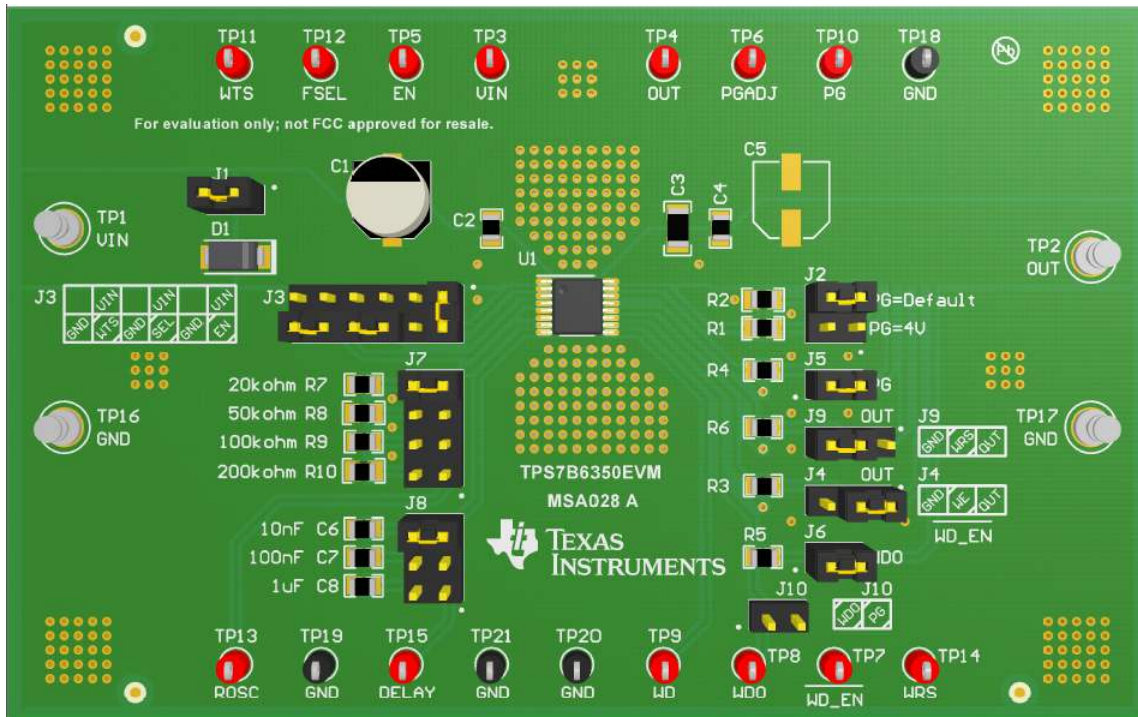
TPS7B6350EVM Component Placement (Assembly Top View)
